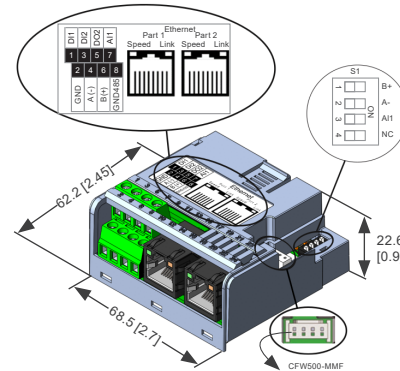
Accessory dimensions in mm [in], DIP switches location and CFW500-MMF connector
